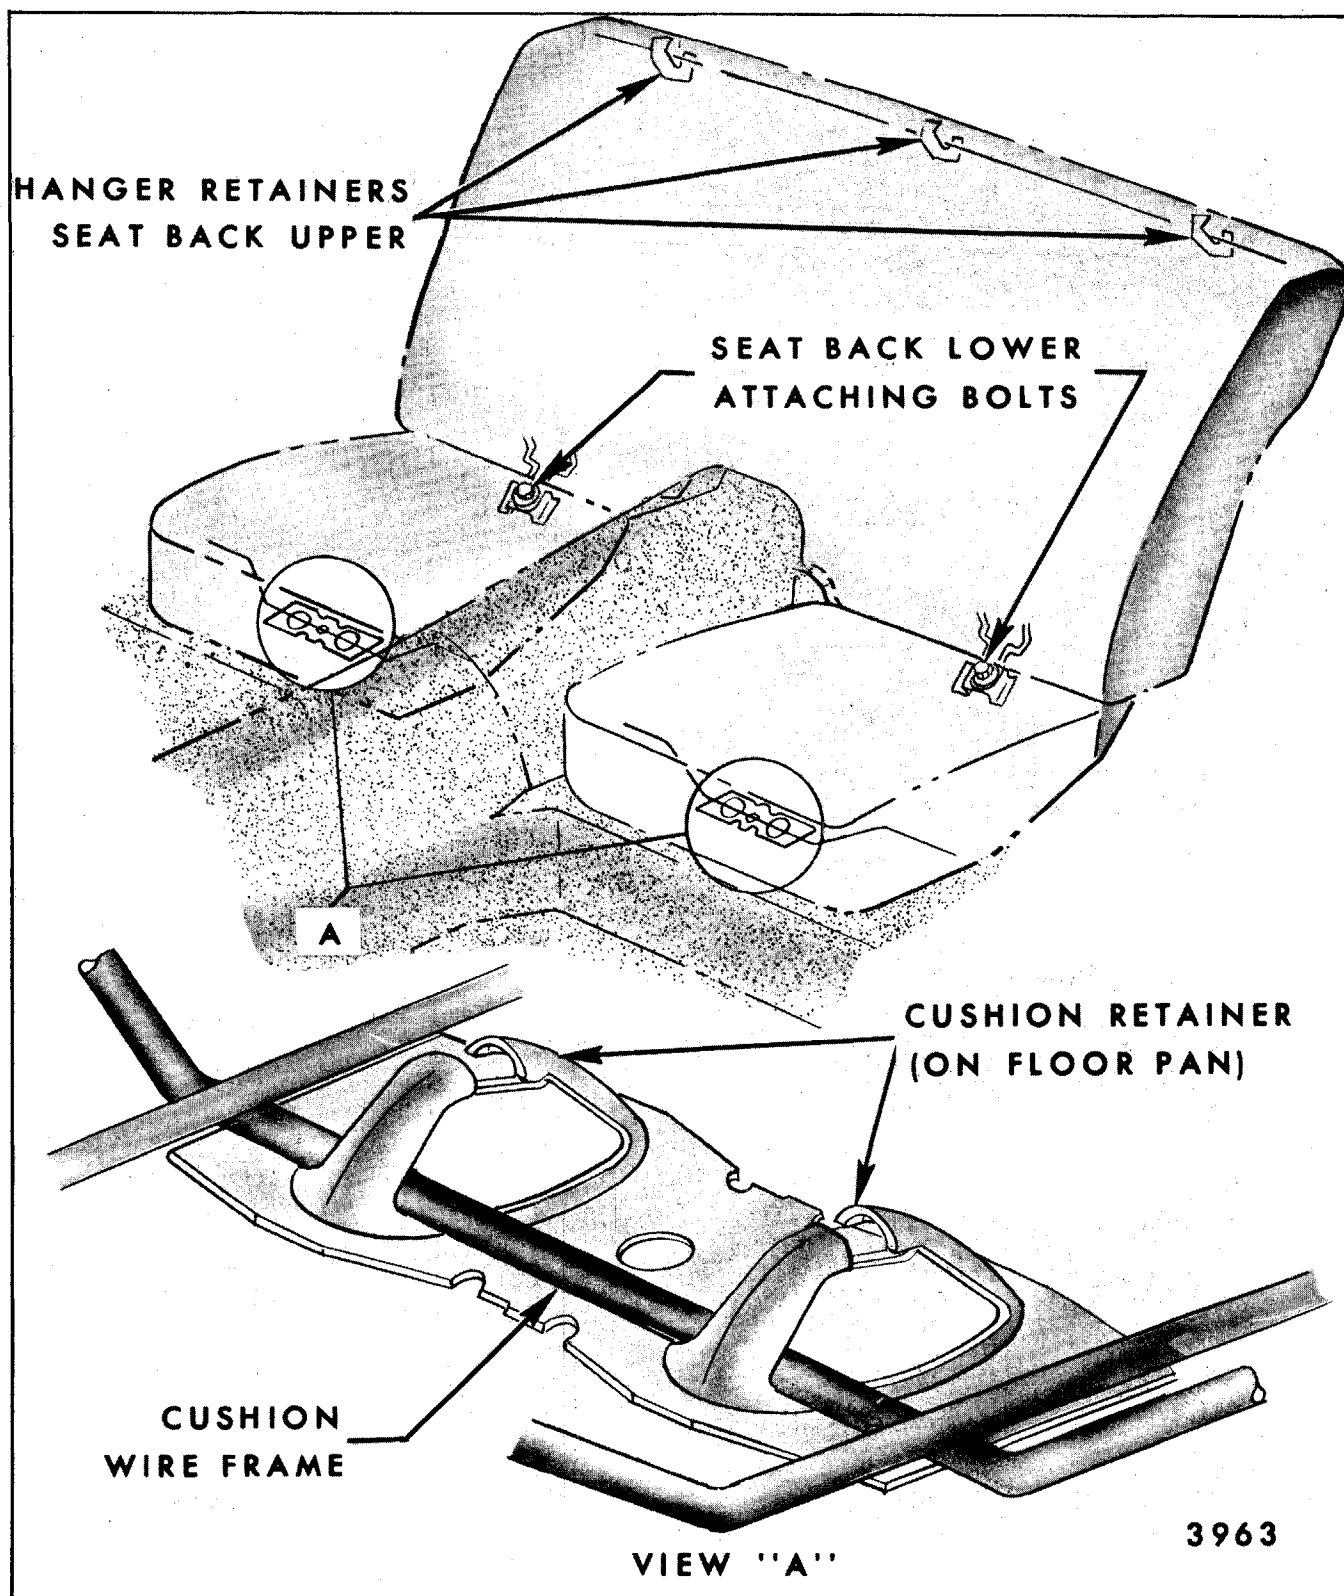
Rear Seat Cushion and Back Installation - "F" Body Styles
